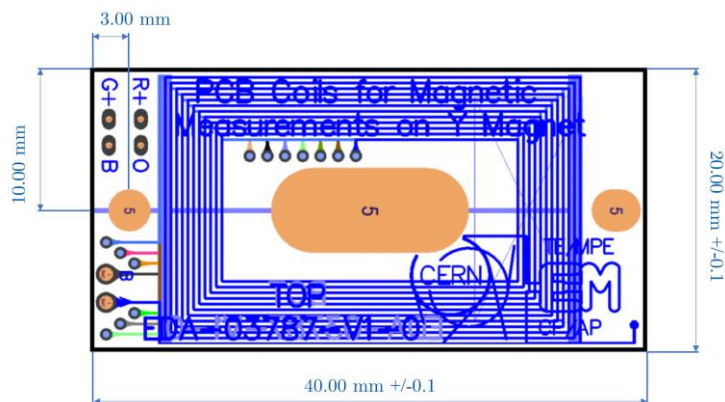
Schematization of the PCB used for the magnetic measurements on the demonstrator magnet during cold test.
